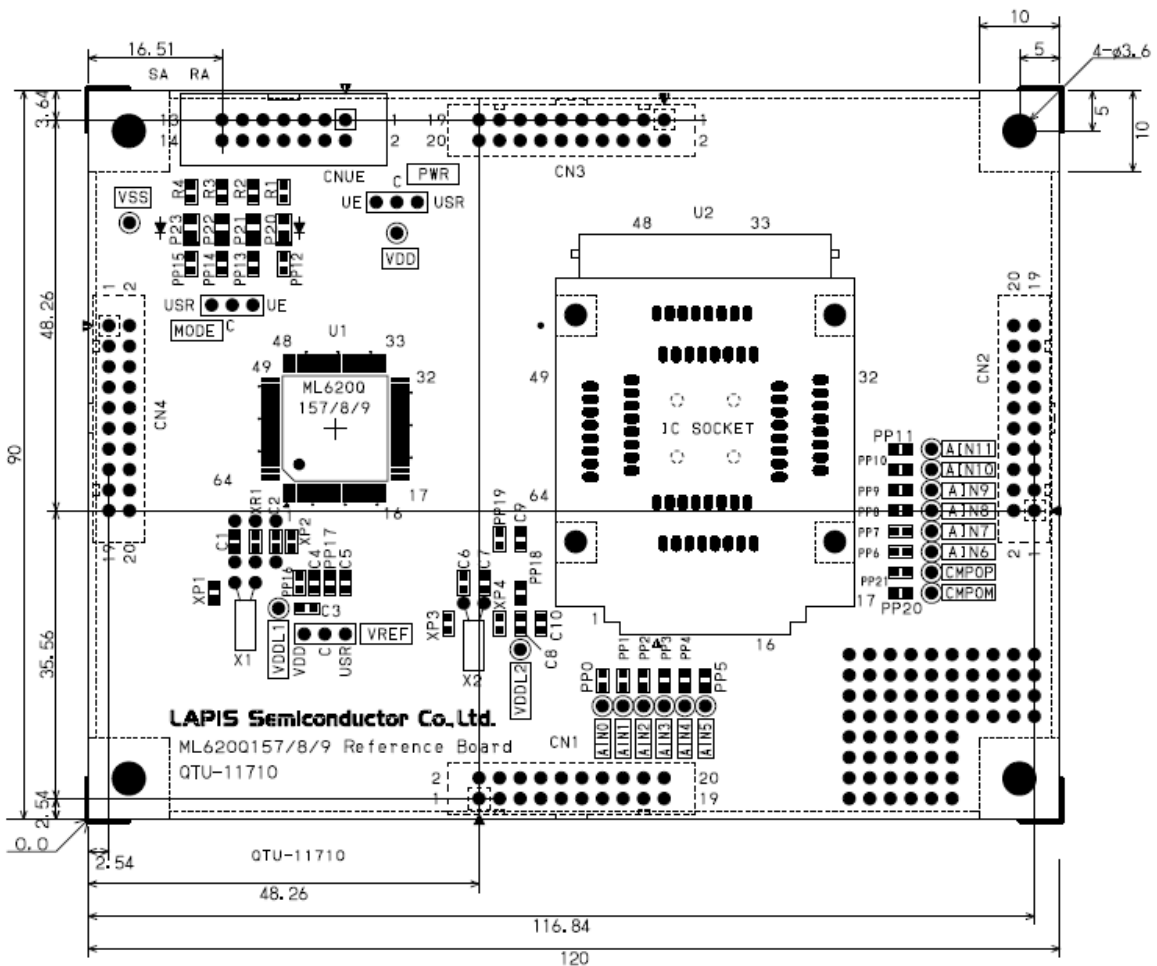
Reference Board PCB dimensional outline drawing and layout of components (Top view)
